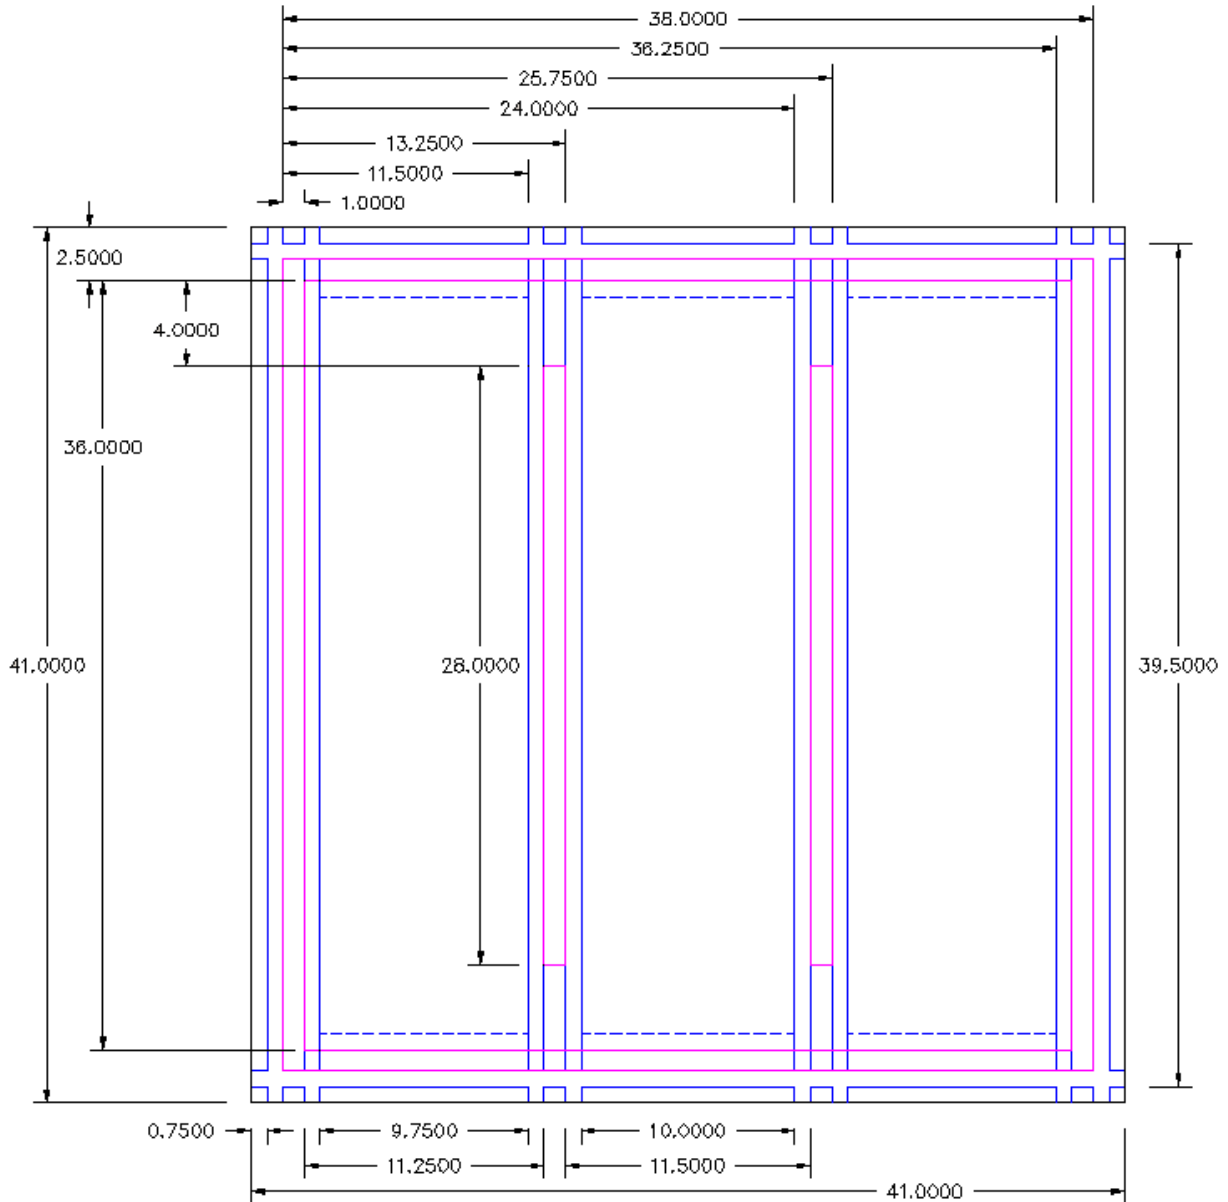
AutoCAD design drawing: Bottom (Initial)
